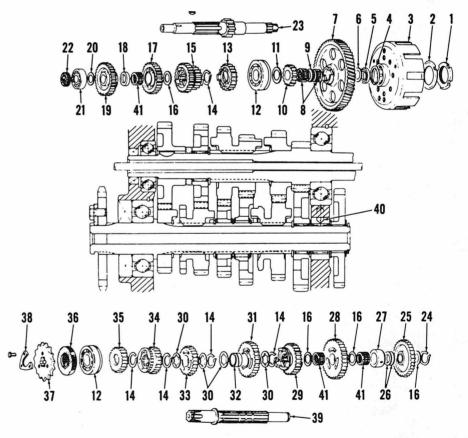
Cross sectional and exploded views of transmission input shaft (23), output shaft (39) and associated parts. Dowel (40) holds bearing outer race (27) in lower crankcase half.
